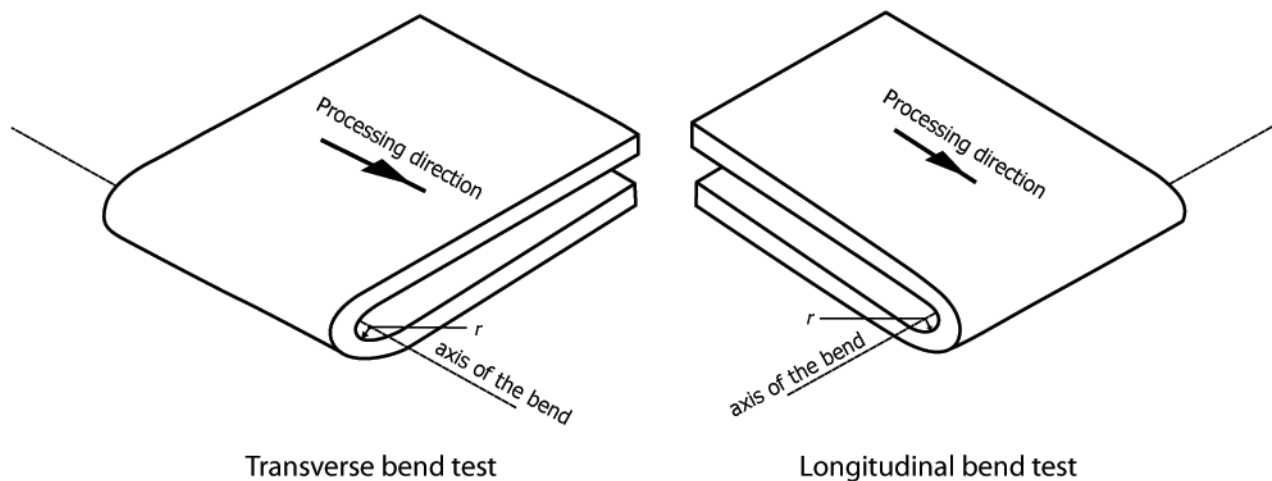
Relationship Between Specimen Long Dimension and Processing Direction in Bend Tests
